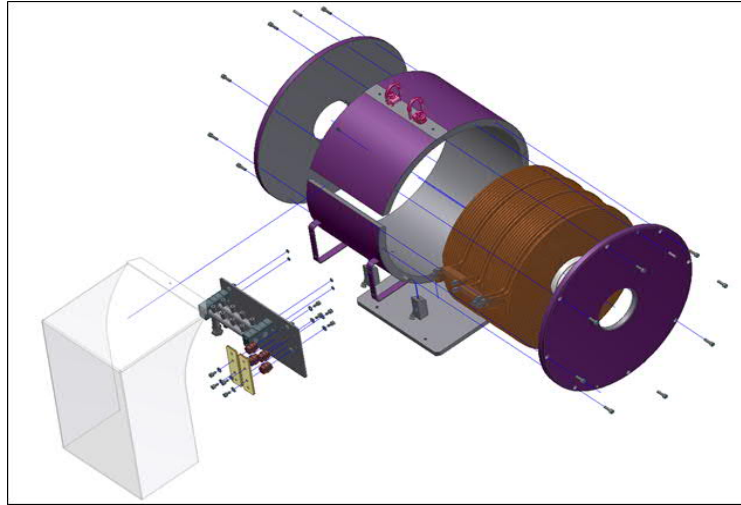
Exploded view of the new Linac4 solenoid.
